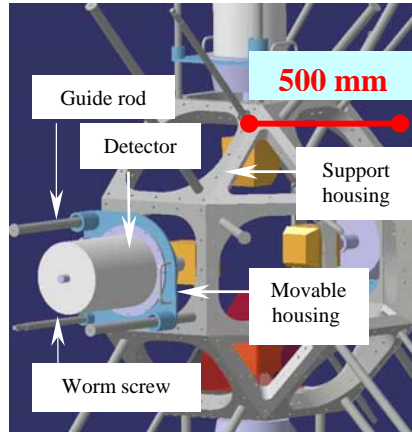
Exploded CAD view of the structure equipped with 4 detectors
